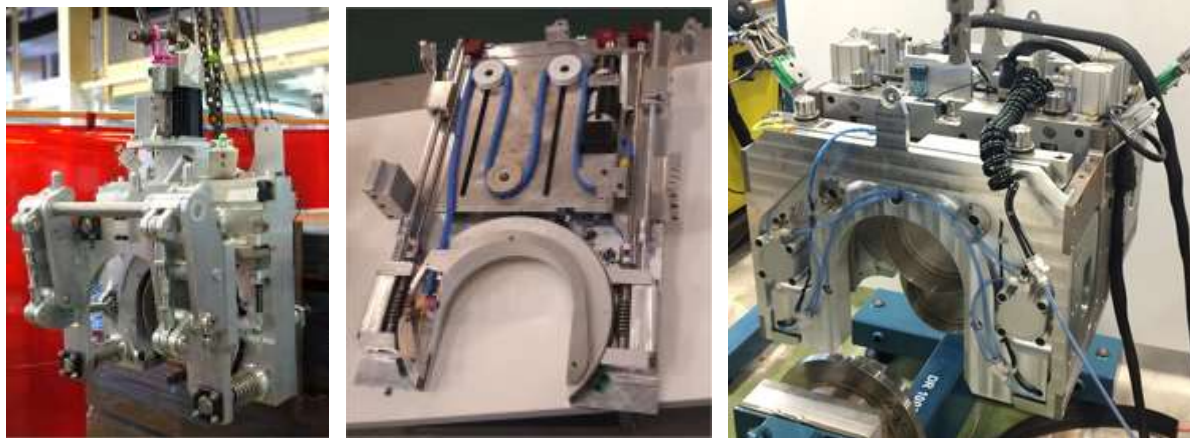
Cutting tool (left), welding tools (centre) and alignment tool (right)
